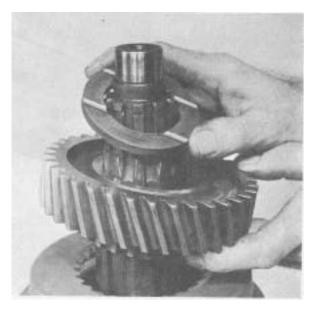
Install 3rd speed gear with clutching teeth down. Install 3rd gear locating washer.
